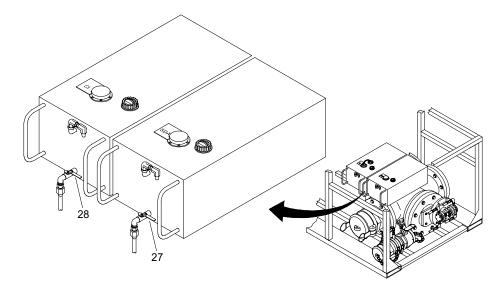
Fuel Additive Injector Assembly Controls and Indicators (Sheet 3 of 3).
